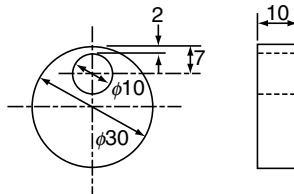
Disk specimen for quench-cracking test. Specimen dimensions were 30-mm diameter by 10 mm thick; specimen contains an eccentrically located 10-mm-diameter hole. (From M. Narazaki, G.E. Totten, and G.M. Webster, in *Handbook of Residual Stress and Deformation of Steel*, G.E. Totten, M.A.H. Howes, and T. Inoue, Eds., ASM International, Materials Park, OH, 2002, pp. 248–295.)
